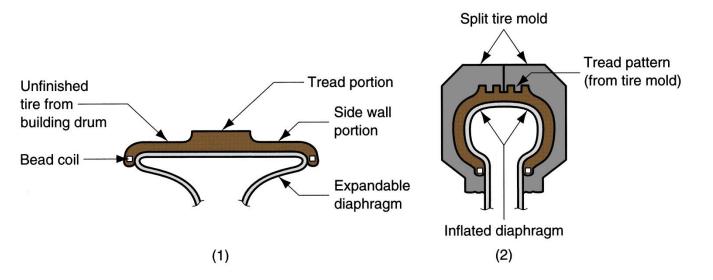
Tire molding: (1) uncured tire is placed over expandable diaphragm; (2) mold is closed and diaphragm is expanded to force uncured rubber against mold cavity, impressing tread pattern into rubber; mold & diaphragm are heated to cure rubber
